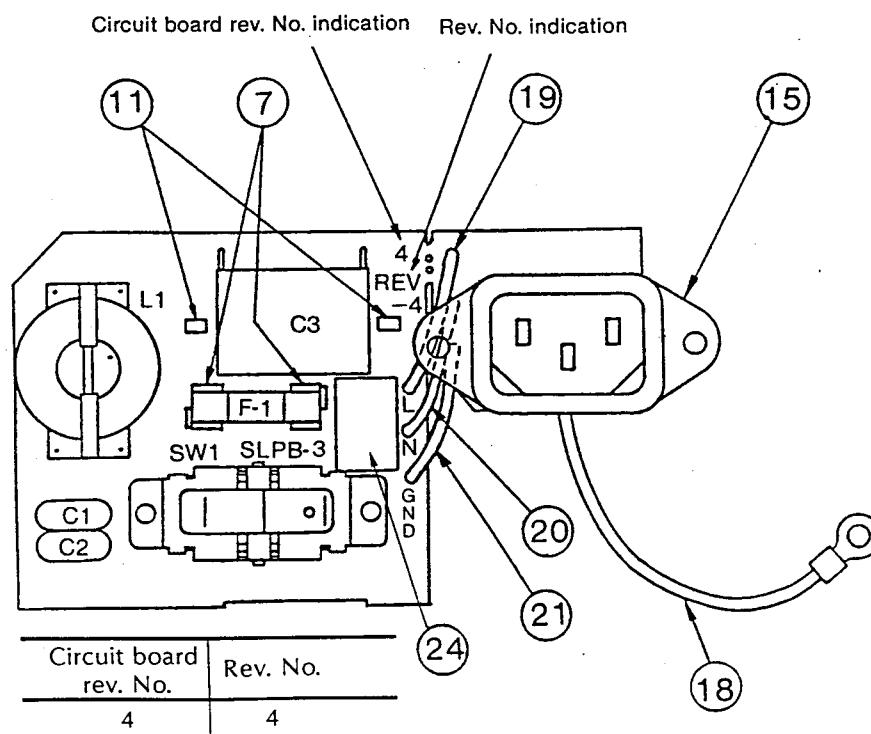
(1/7) Printed-Circuit Board (3YU5003-5611G2)
